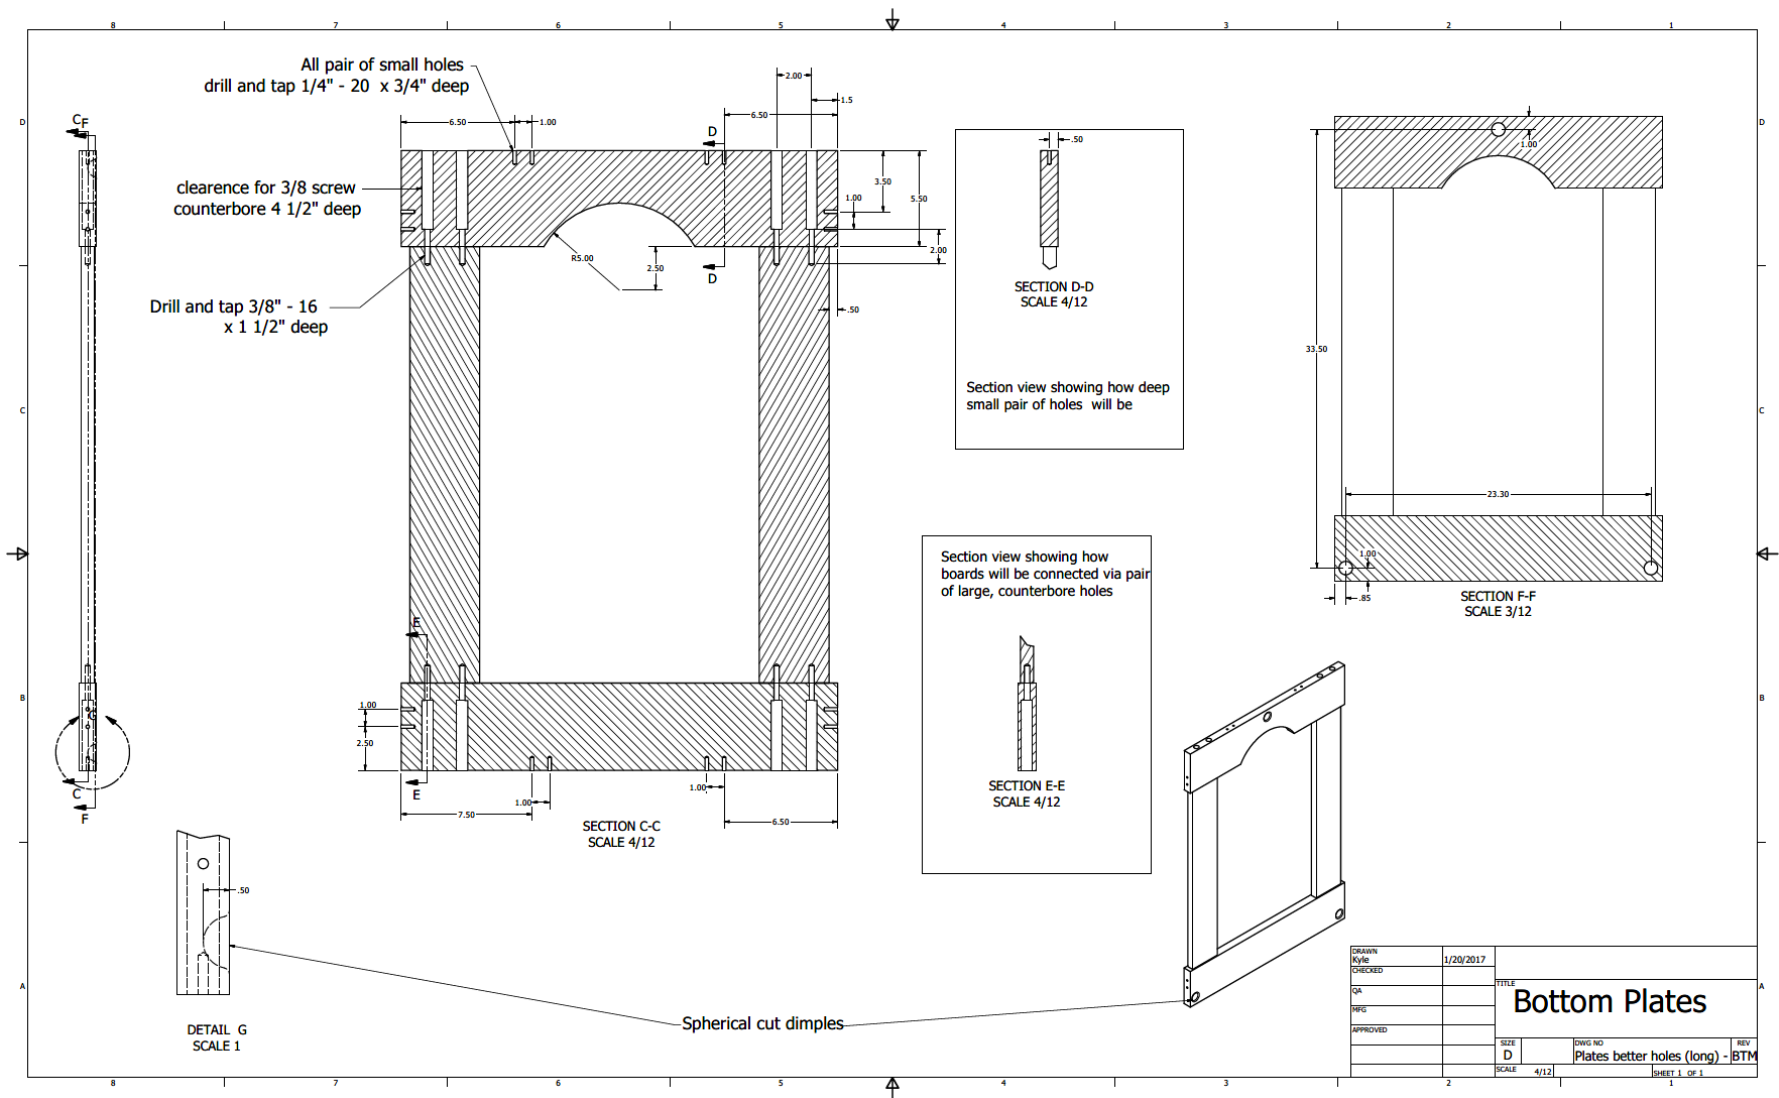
Technical drawing of lower (bottom) adjustable aluminum plates.
